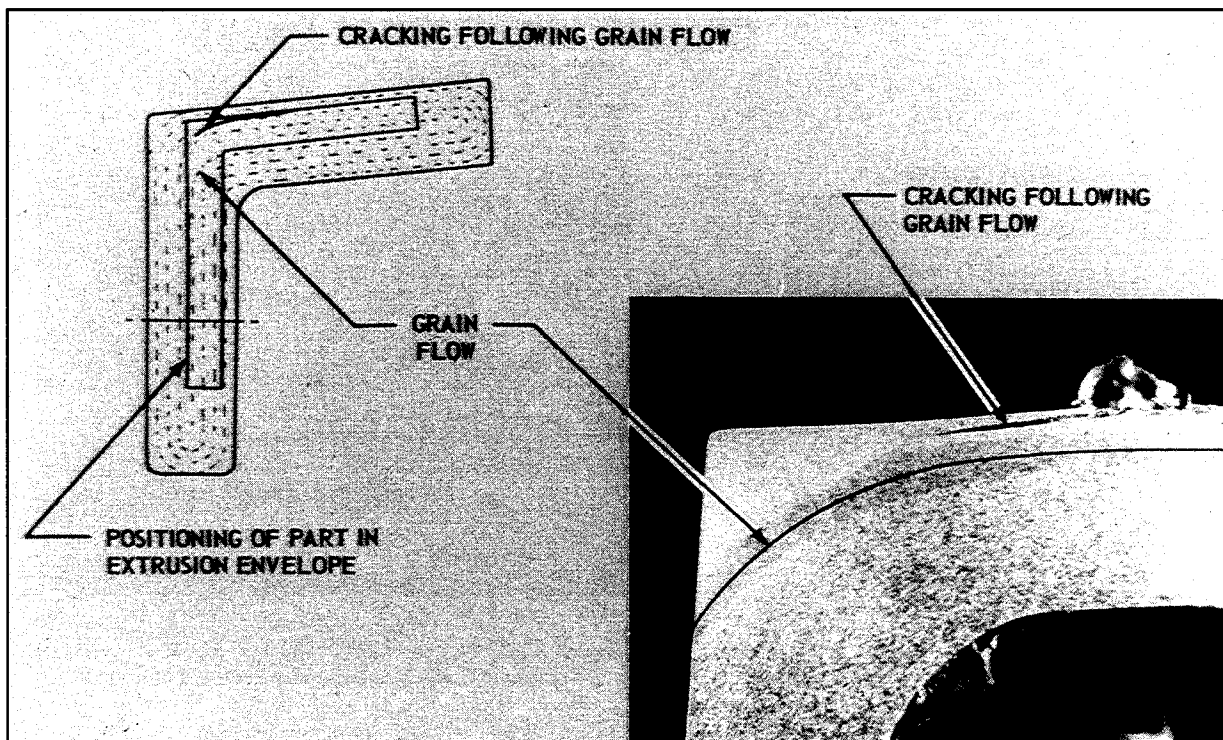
STRESS-CORROSION CRACKING OF AN EXTRUDED SECTION
